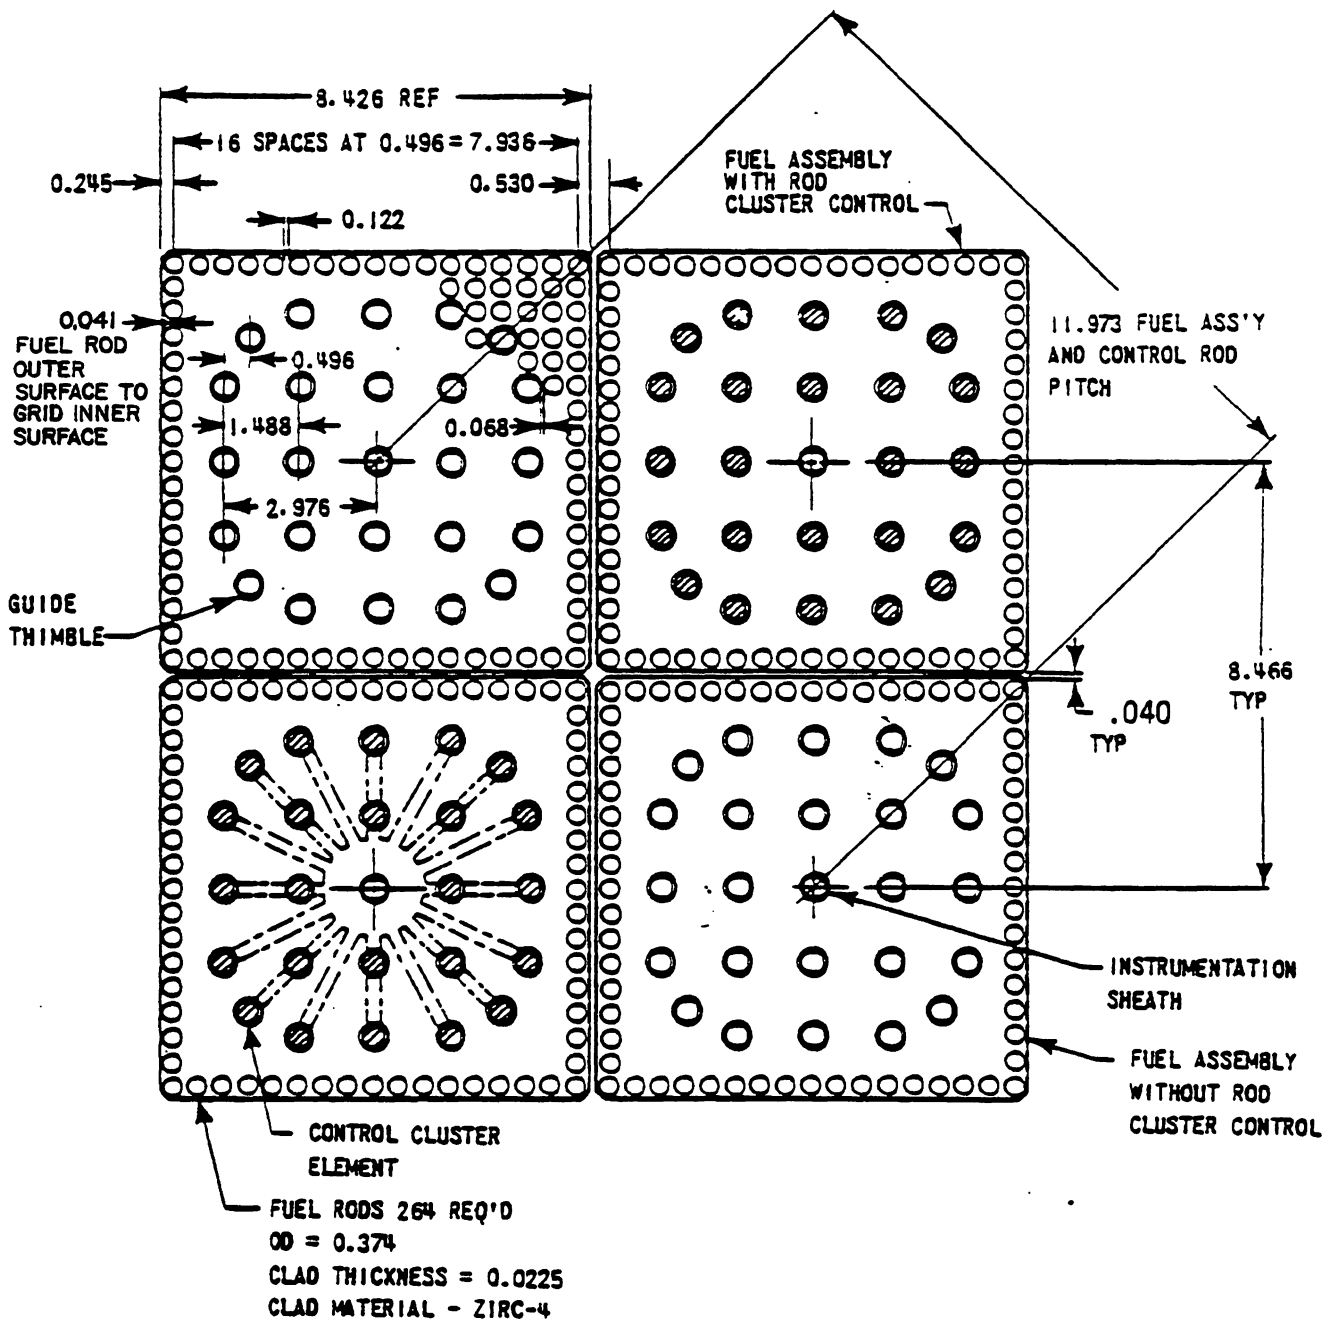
Fuel Assembly Cross Section 17 x 17
